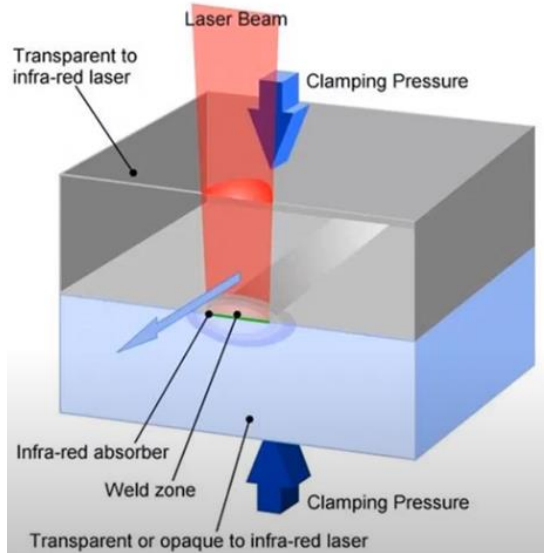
Schematic representation of Transmission laser welding process [26].
